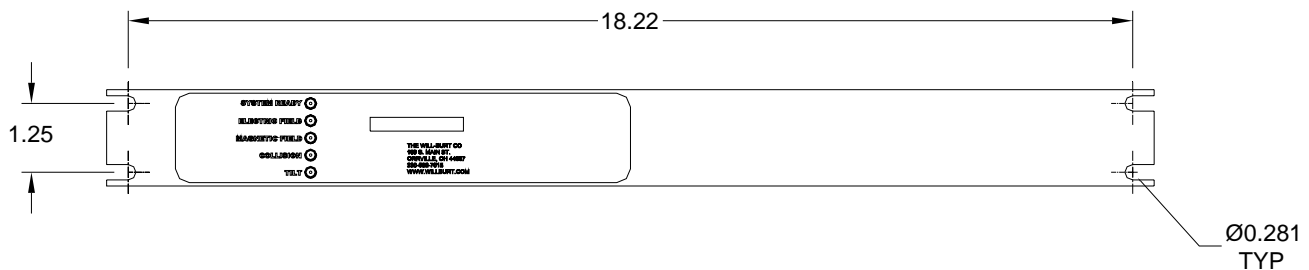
Mounting Dimensions for Rack Mounted Display
